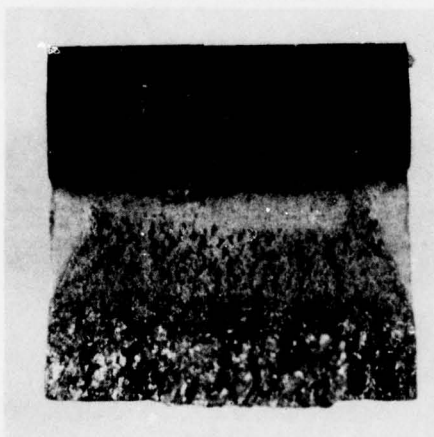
HY-130 weld metal Charpy specimen F2-3 fracture
